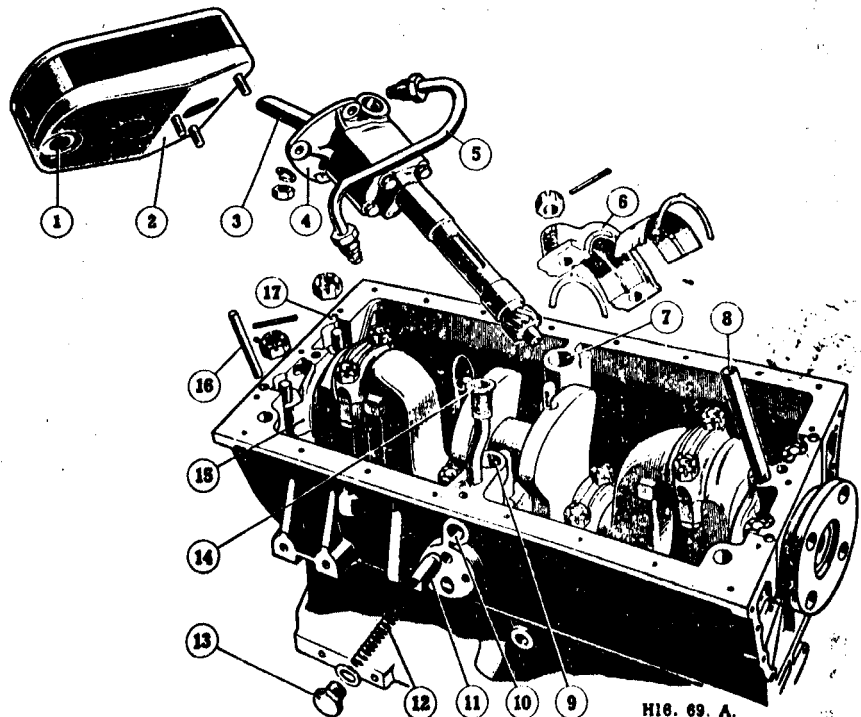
gives a view of the engine in this position with the sump detached and the centre main bearing cap removed, special attention being drawn to the pair of thrust washers each side.
